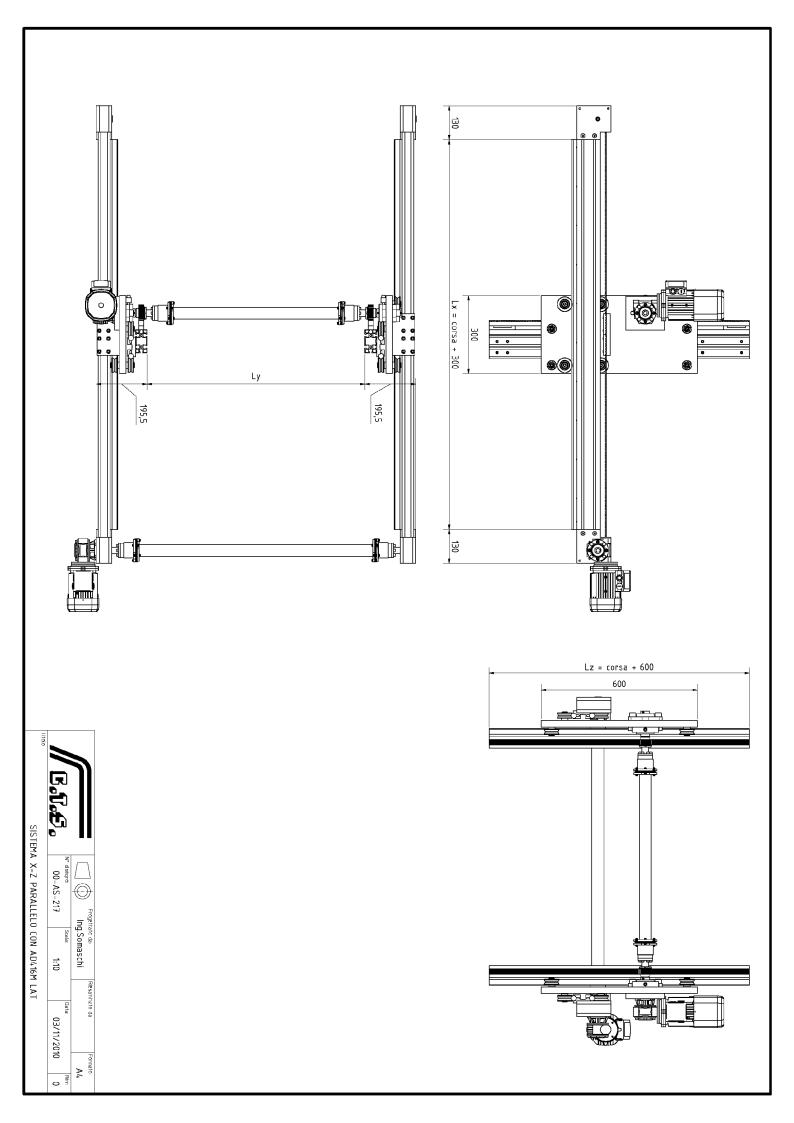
AS-217 MIDDLE-HEAVY VERSION WITH AD416 GUIDES
